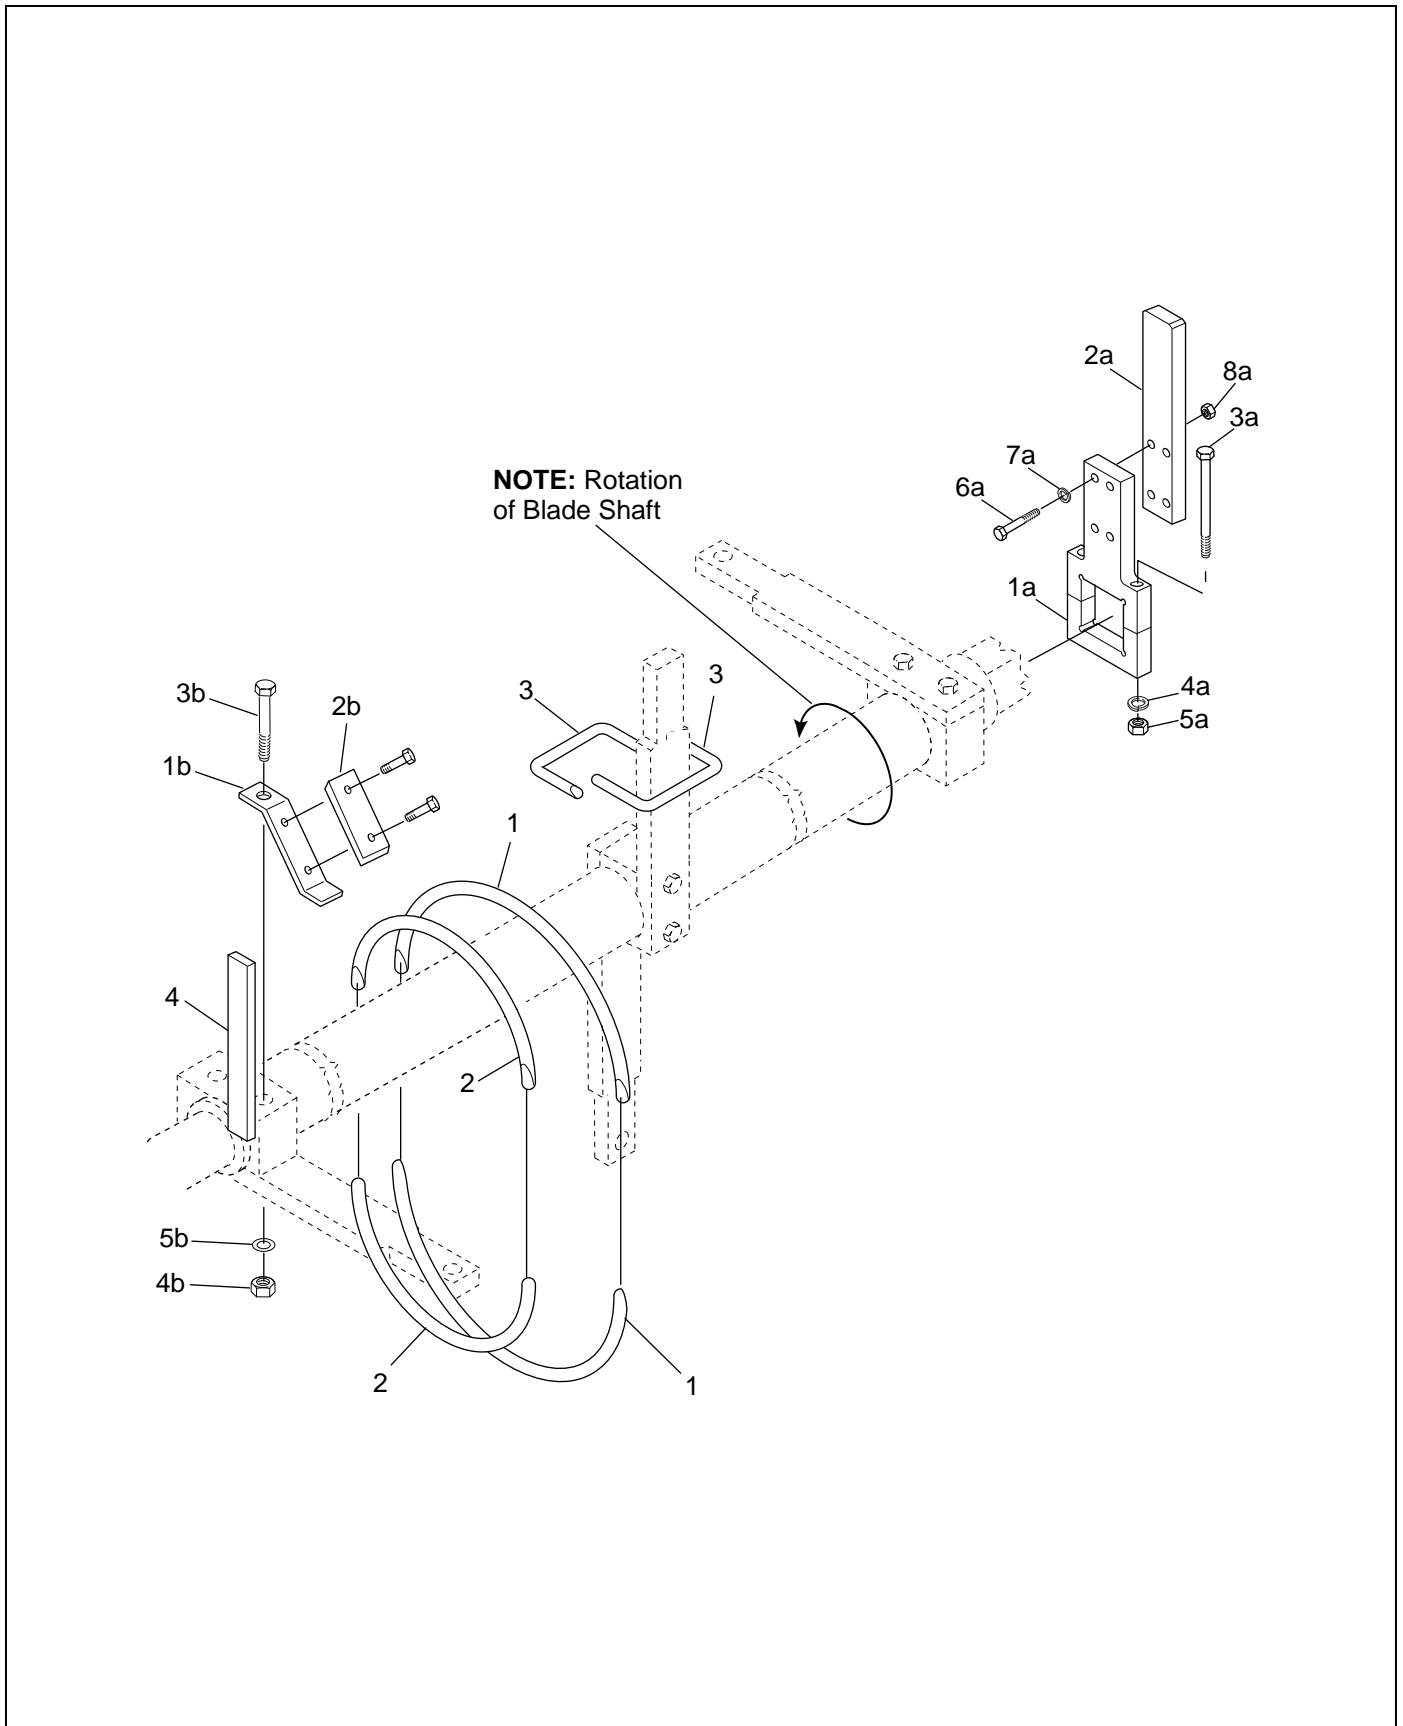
Ring Assembly – Blade Shaft Cleaning, Head Scraper Subassembly, and Tension Strap – Blade Arm (#292016, #262742 and #282998)
